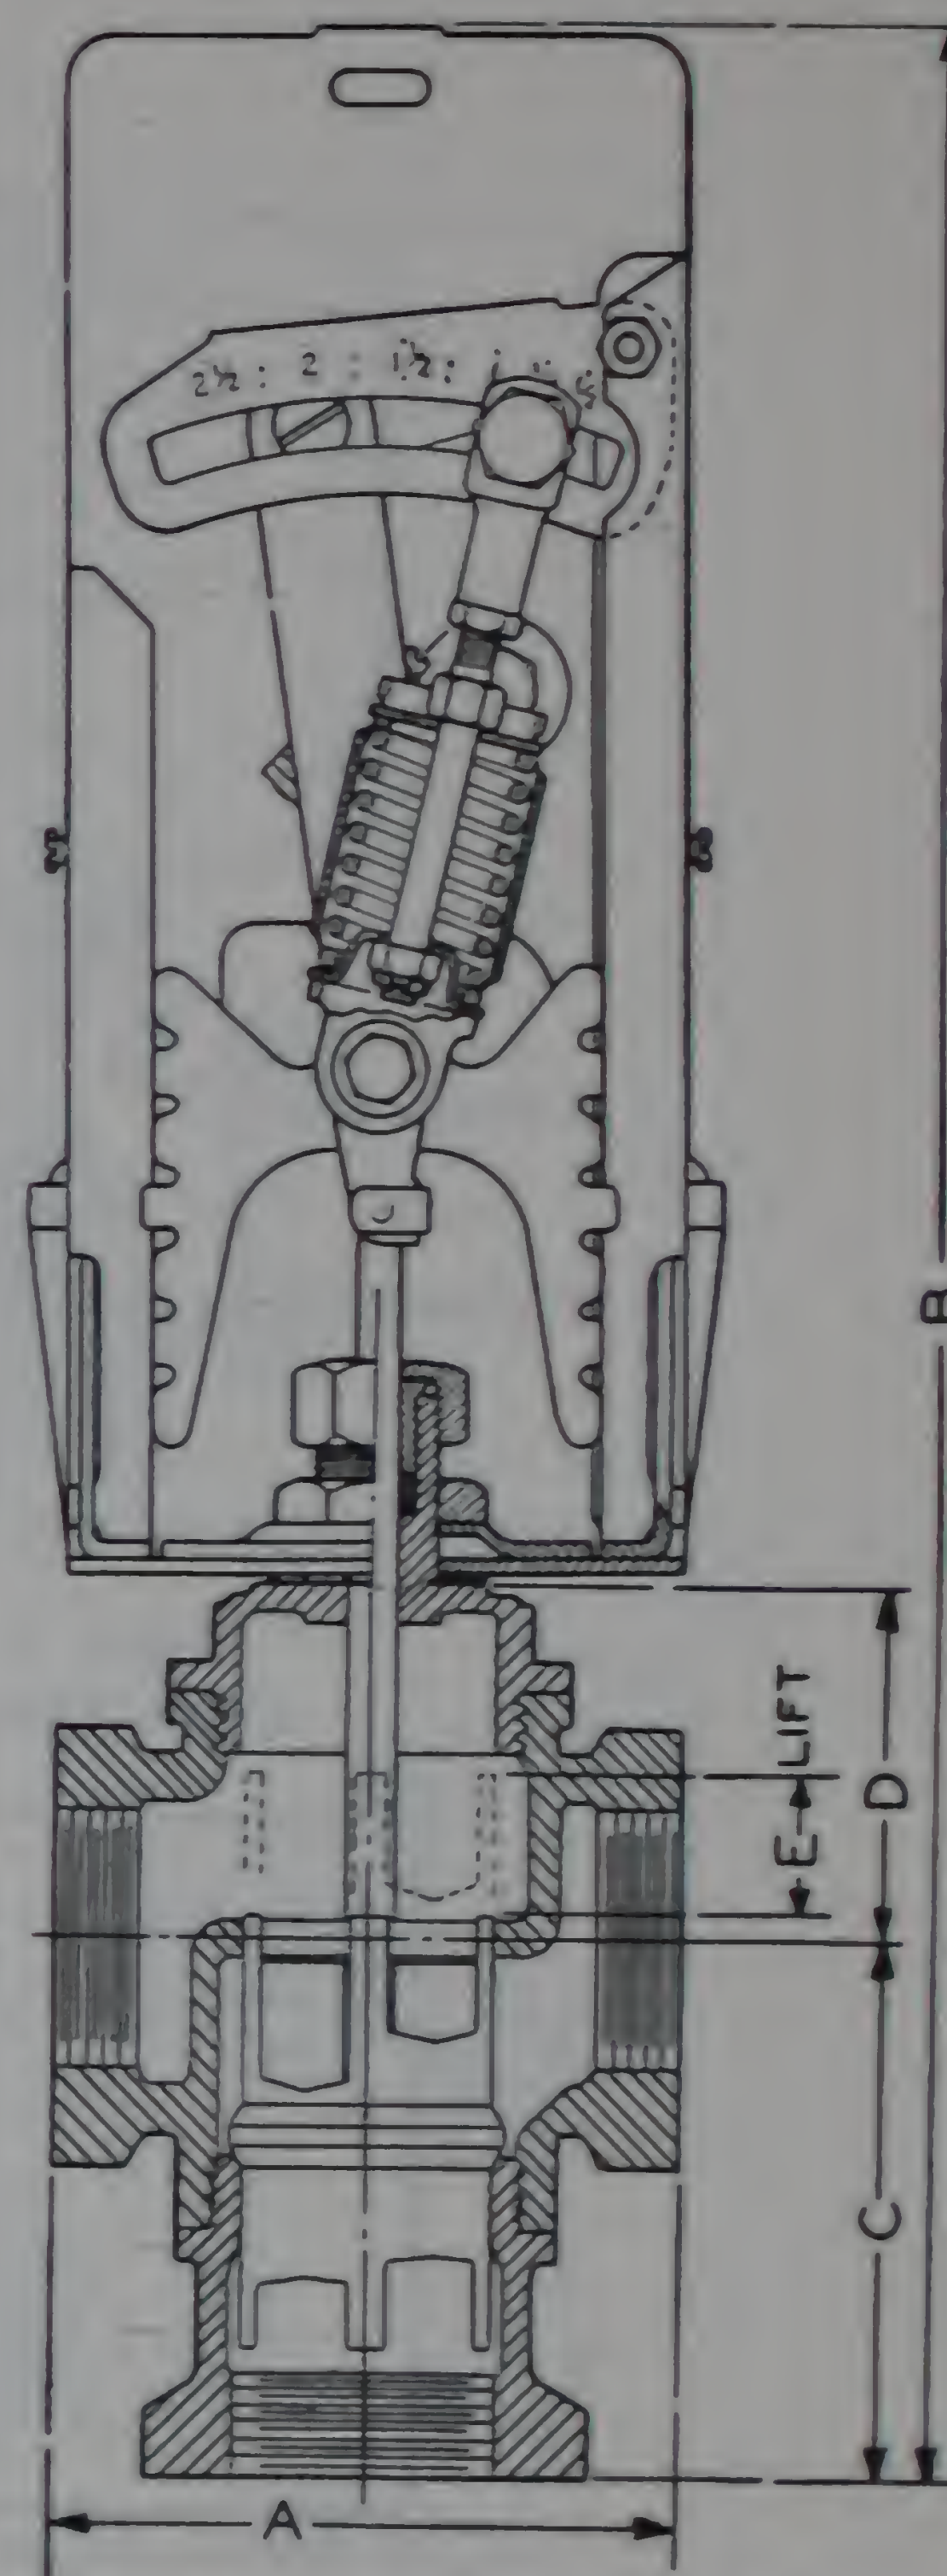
Dimensional drawing of screwed Type K203 Motorized Valve.
